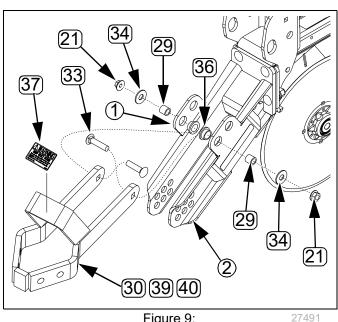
UMC-RC Arm Mounting Alternate Bushing Placement
